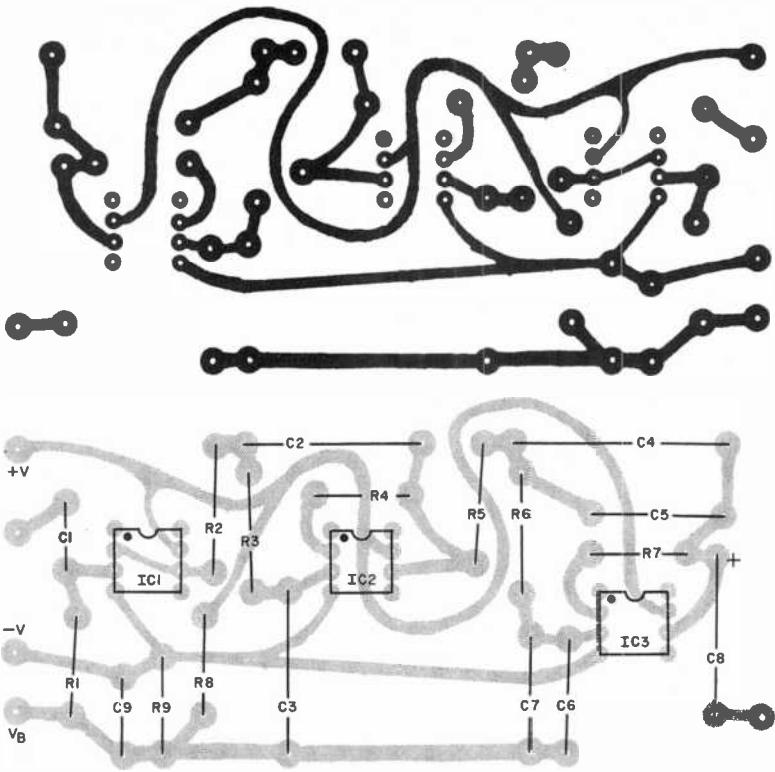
Actual-size foil pattern (above) and component layout guide.
